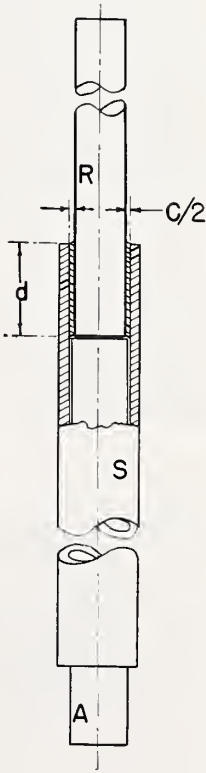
Specimen assembly for tensile tests of joints with different diametral clearances, or different depths of bore.
